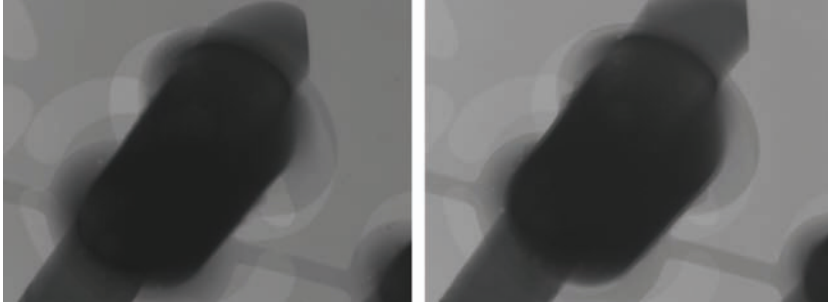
X-ray images show 100% fill on connector pins on the six-layer 1.6mm boards. Convection reflow with Hot Air Solder Level (HASL) (left). Vapour phase with a silver PCB solder finish (right). The x-ray images show virtually no void formation and positive solder fillets on the top and bottom of the through-hole barrel.
